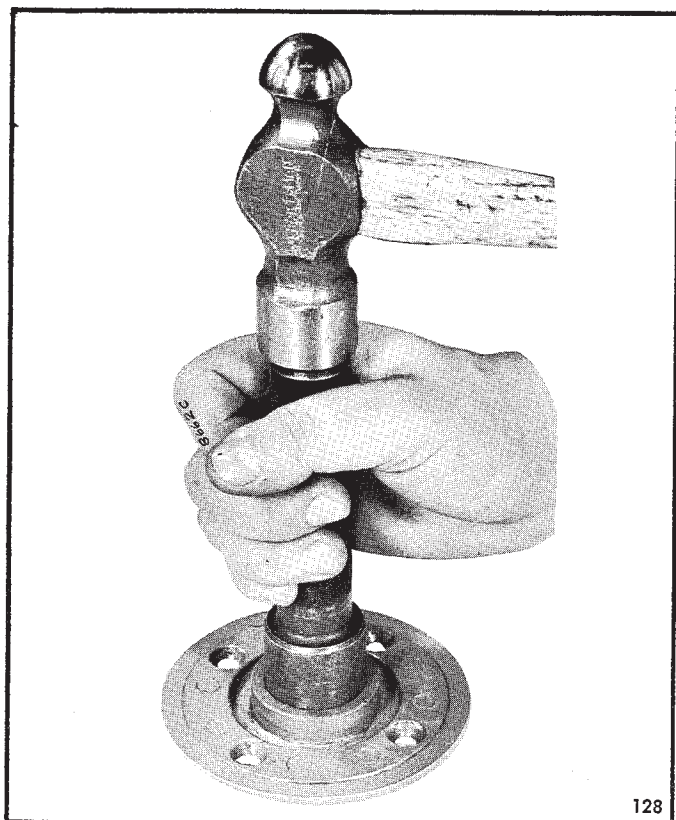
INSTALLING CRANKSHAFT SEAL
